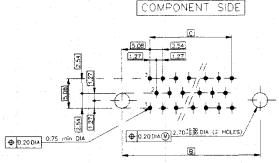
MOUNTING PATTERN, IN PARALLEL ARRANGEMENT BOARD-TO-BOARD CONNECTION, (RECOMMENDED PCB HOLE CONFIGURATION).
